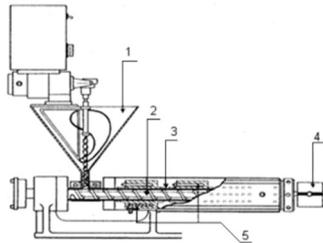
Single-screw laboratory extruder "Brabender 20 DN".
